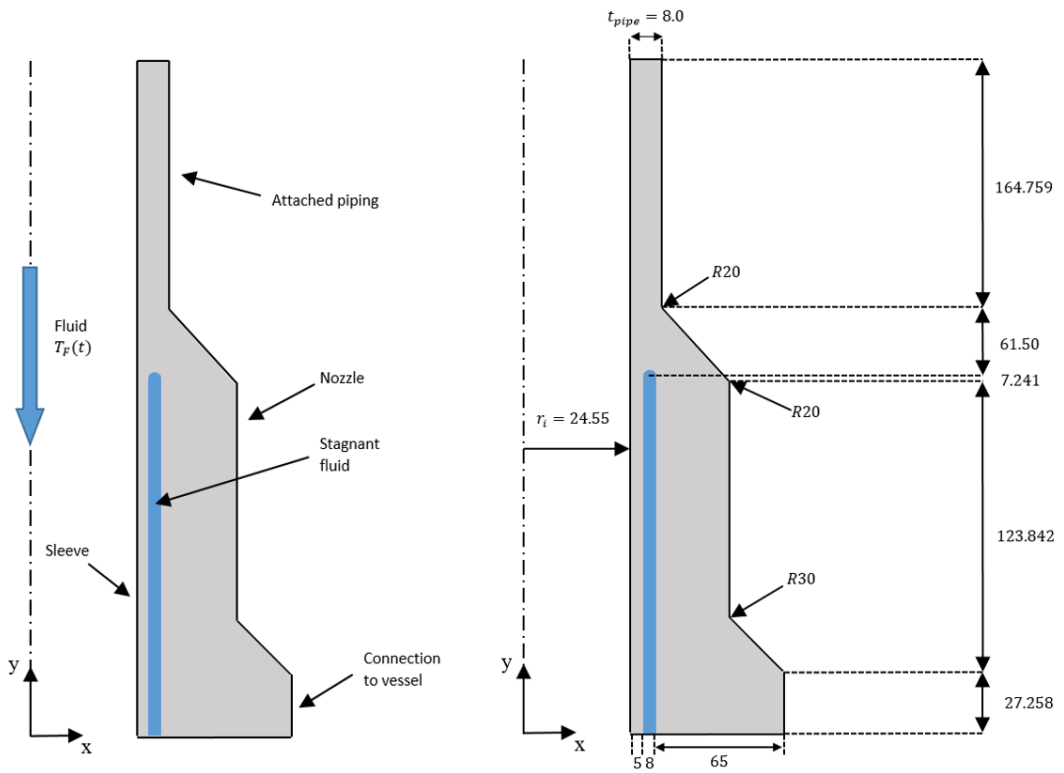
Geometry and major dimensions of PWR nozzle with thermal sleeve from Hübel [175]
